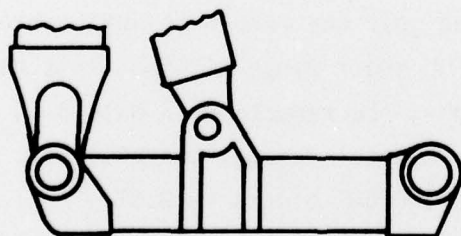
WING UPPER SURFACE SKIN - STRINGER ATTACHMENT
